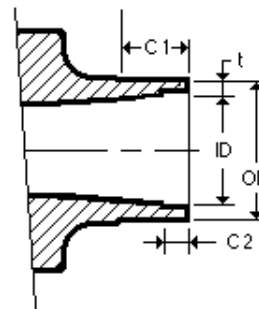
Opt-24 Butt Weld End Connection
